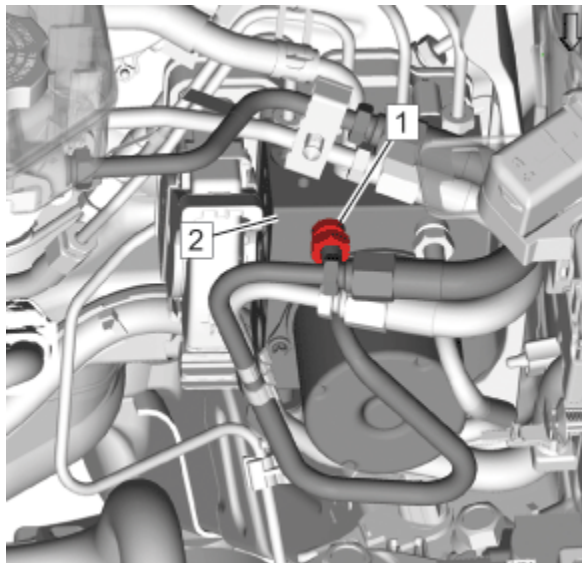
Brake Pressure Modulator Valve And Brake Pressure Modulator Valve Primary Pipe
